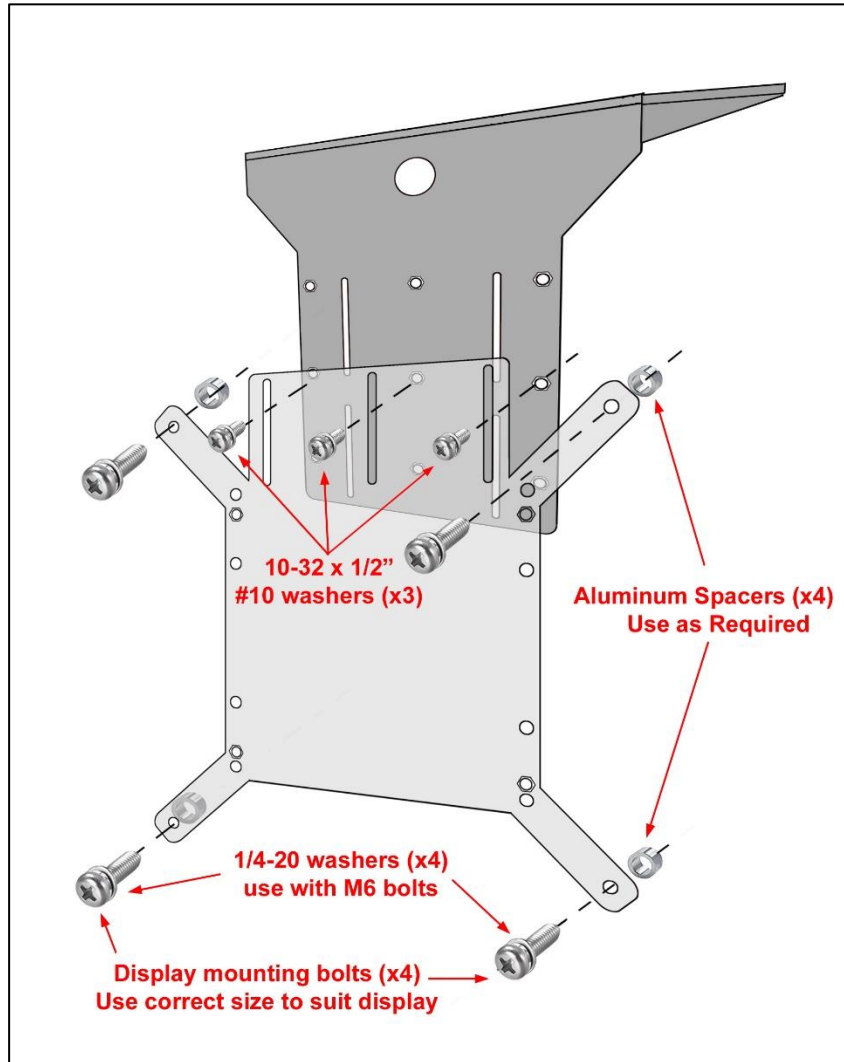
Assembling the 200mm/300mm Mounting Bracket
